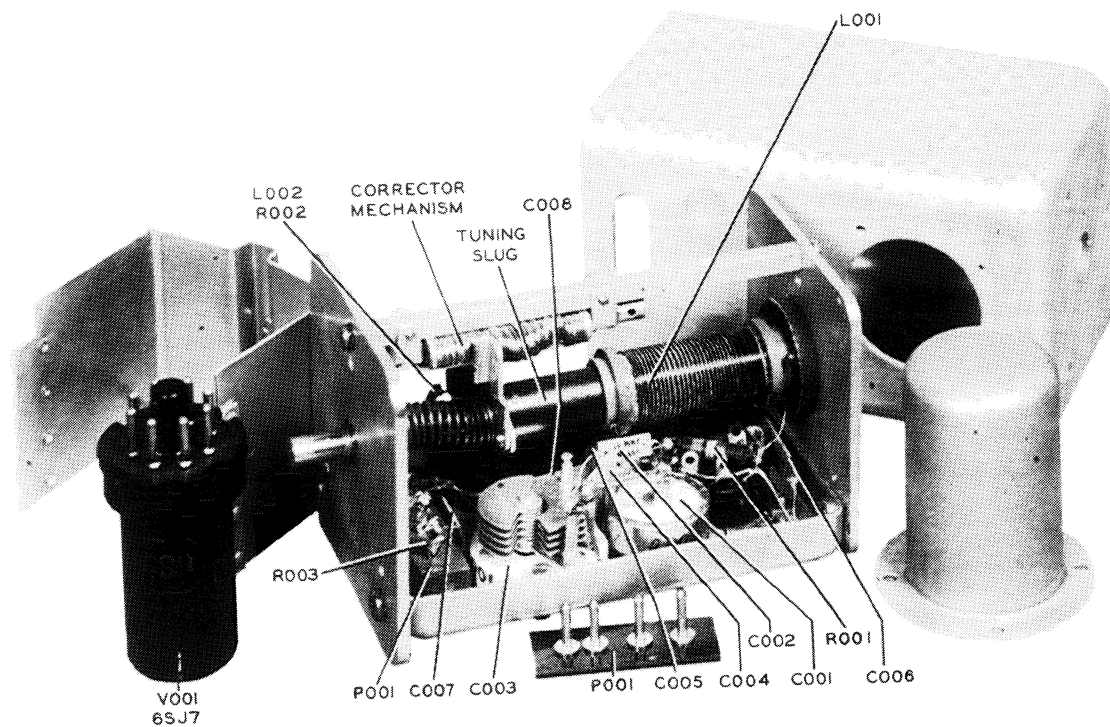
PARTS ARRANGEMENT 70E-8 - OPEN
